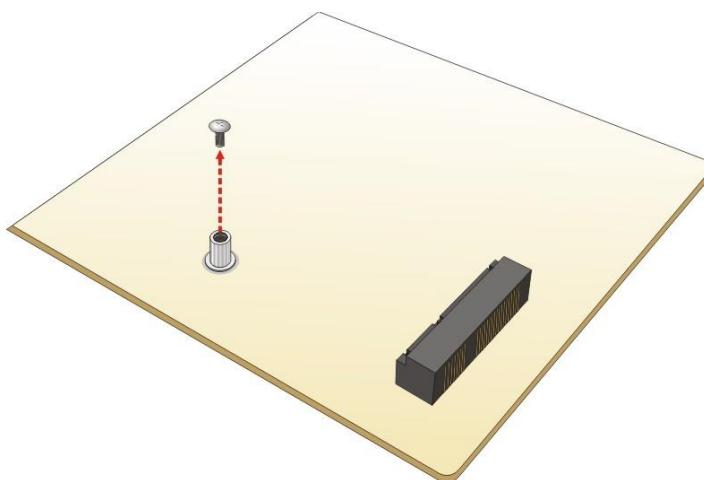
Removing the PCIe Mini Card Retention Screw
